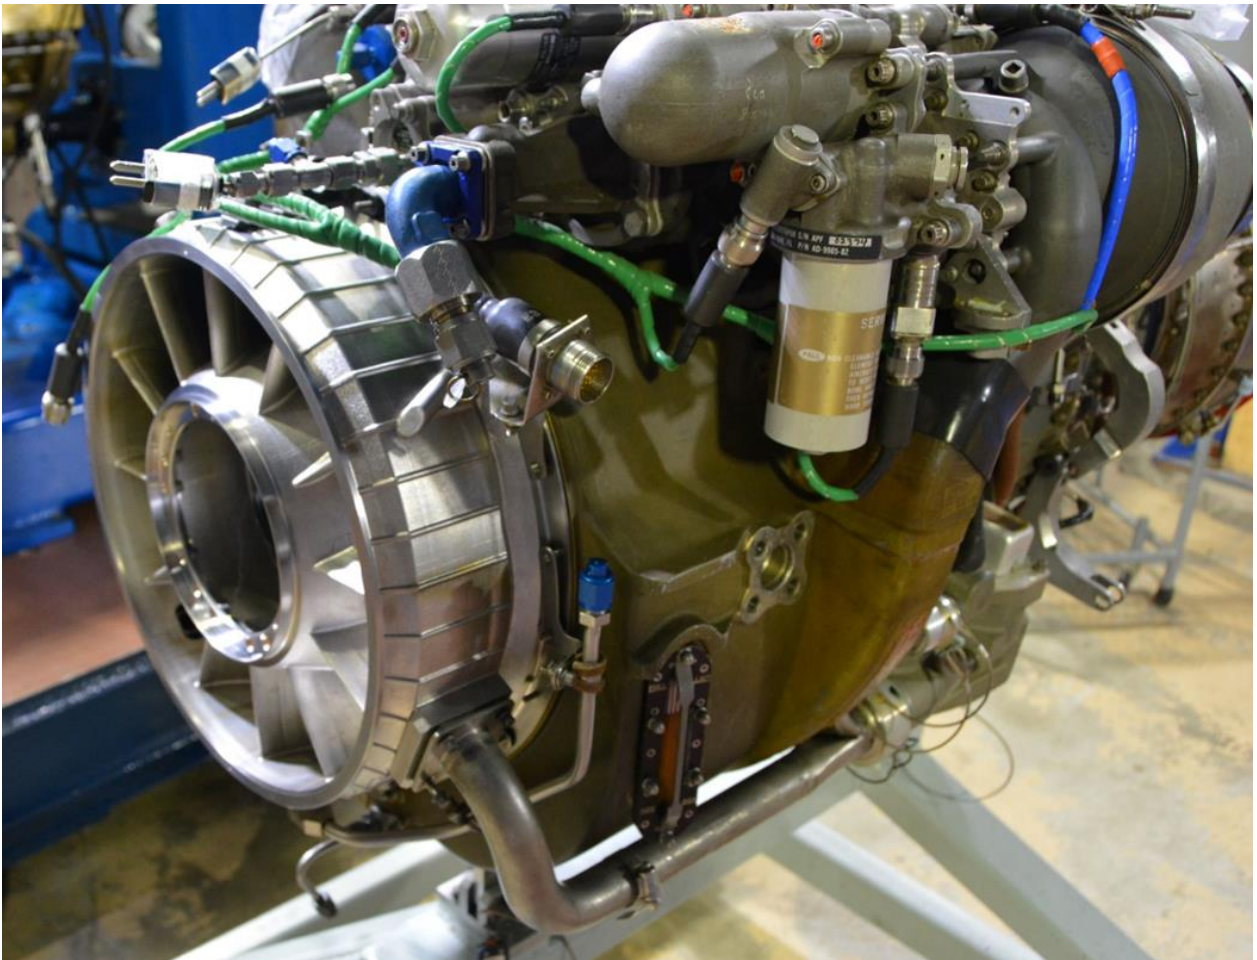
Final Assembly Fit Check – 17A206-230G01 Additive Swirl Frame Installed on U.S. Navy T700-401C Engine
